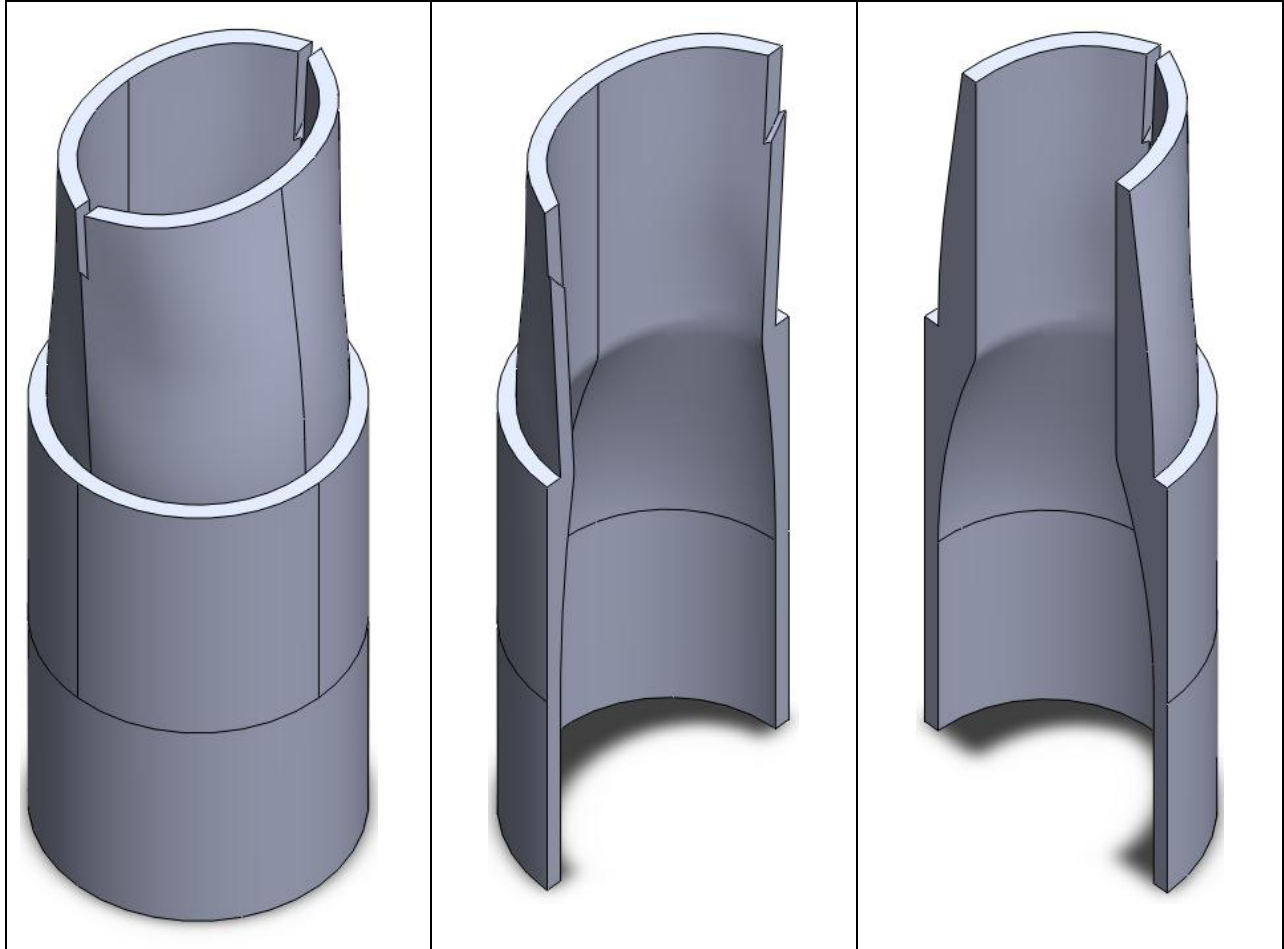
Isometric views of the proposed valve geometry (left) and halved along the major (middle) and minor (right) axes.
